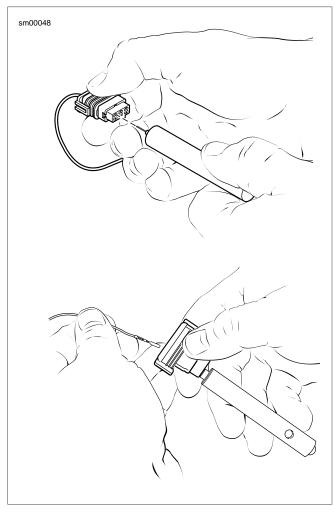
Packard Micro 64 Connector: Insert Tool and Remove Terminal
